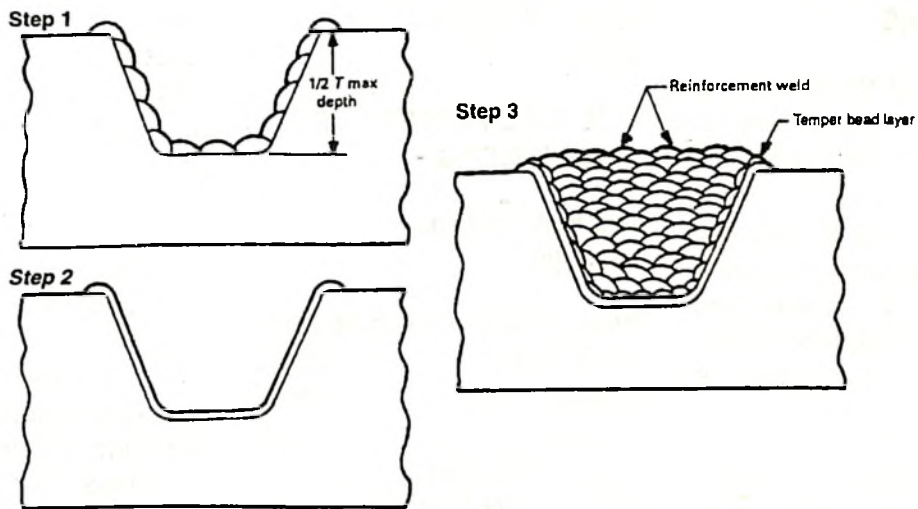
Temper bead weld repair and weld temper bead reinforcement [6] by the SMAW process. (Step 1: Butter cavity with one layer of weld metal 2.5mm diameter coated electrode. Step 2: Remove the weld bead crown of the first layer by grinding or machining. Step 3: The second layer shall be deposited with a 3.15mm diameter electrode, and subsequent layers shall be deposited with welding electrode no larger than 4mm diameter.)
